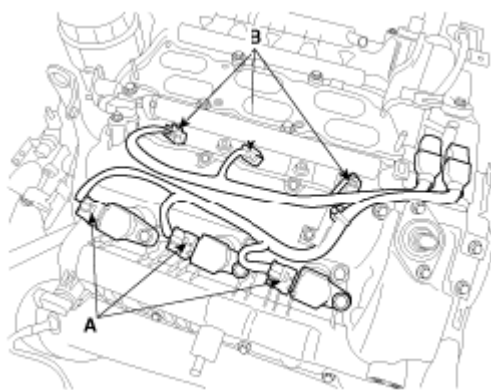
Identifying RH Ignition Coil Connector & Injector Connector
